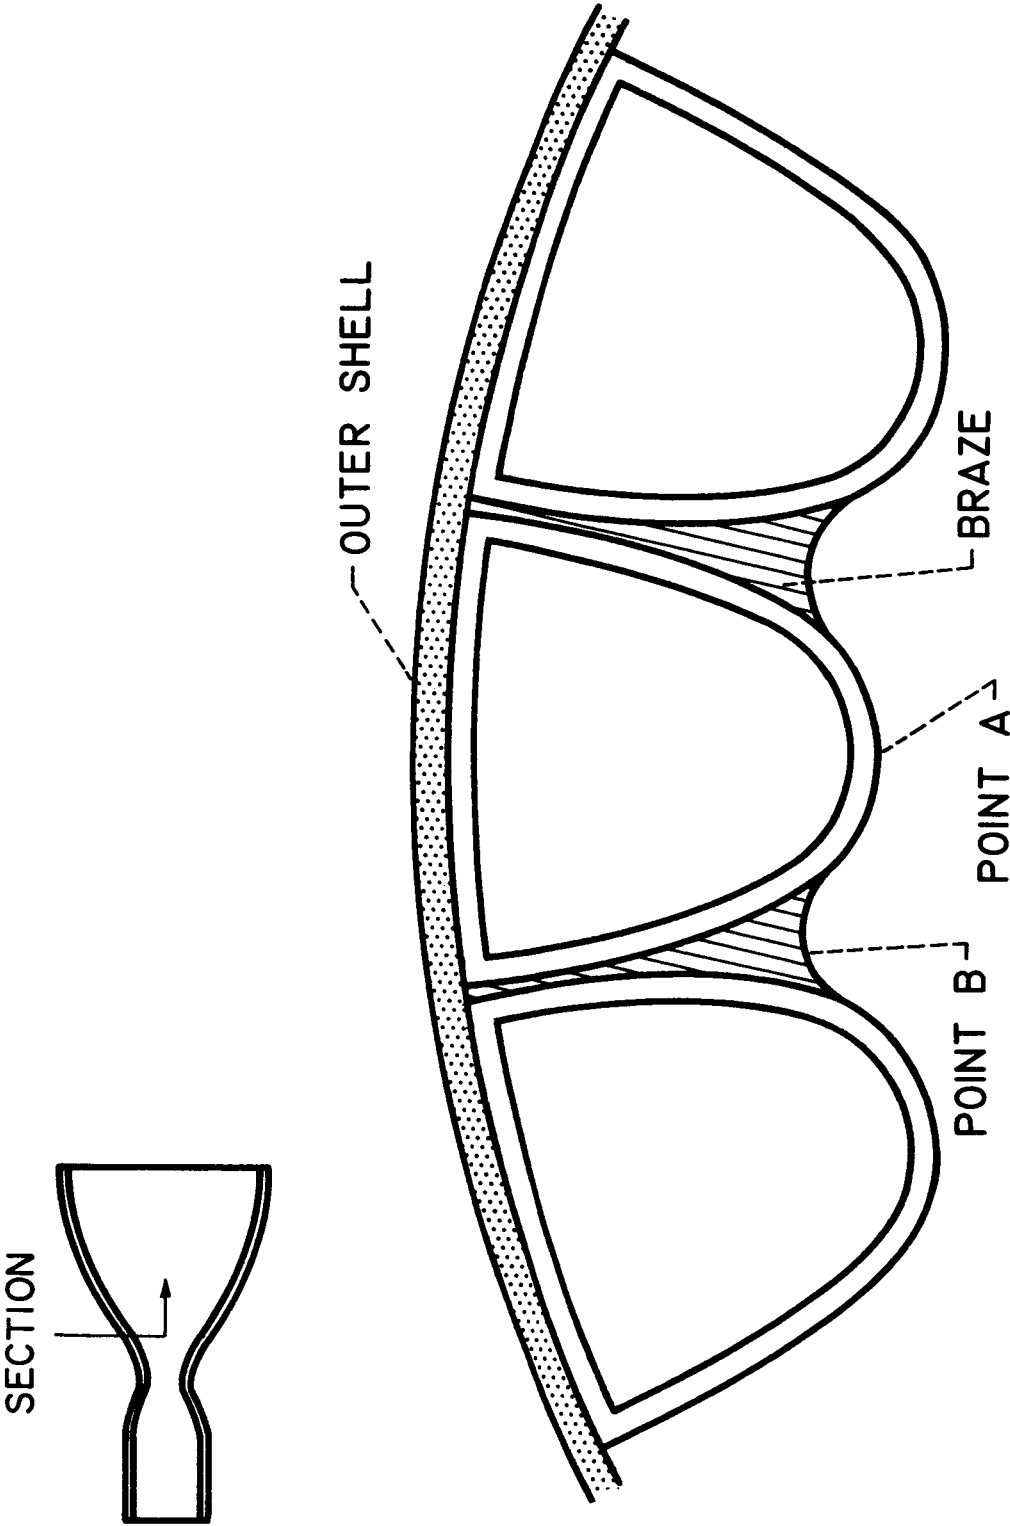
Cross-section of typical rocket engine tube bundle.
